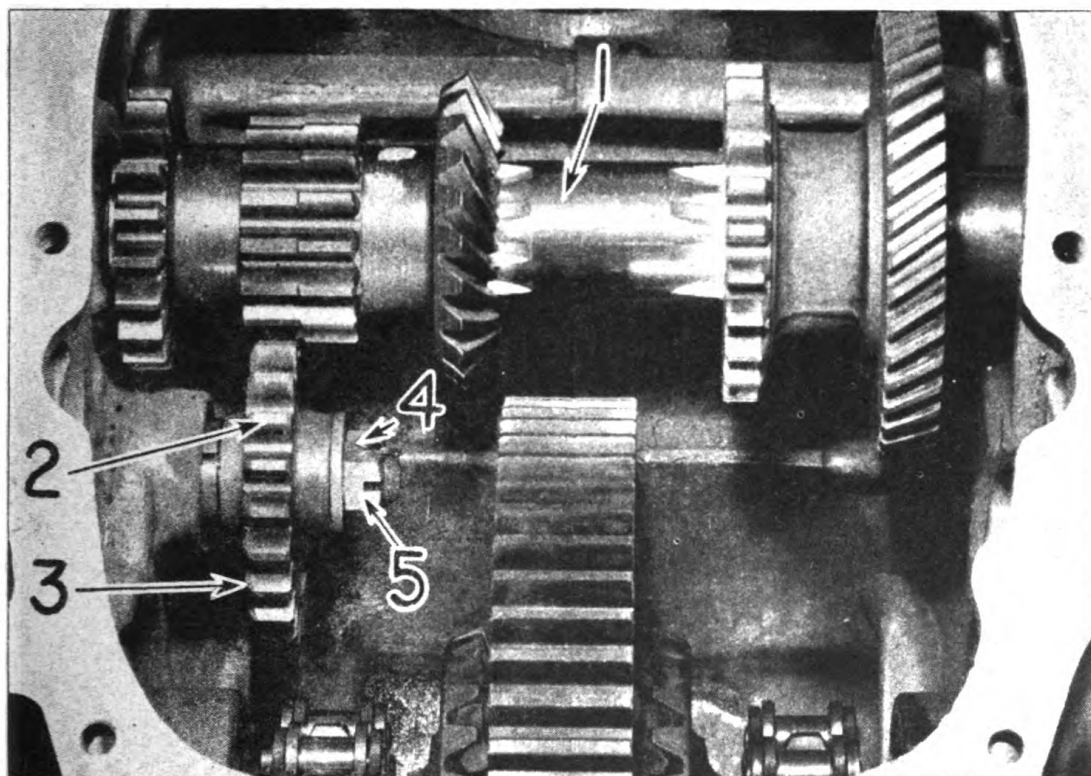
First Reduction Shaft and Reverse Idler Gear
